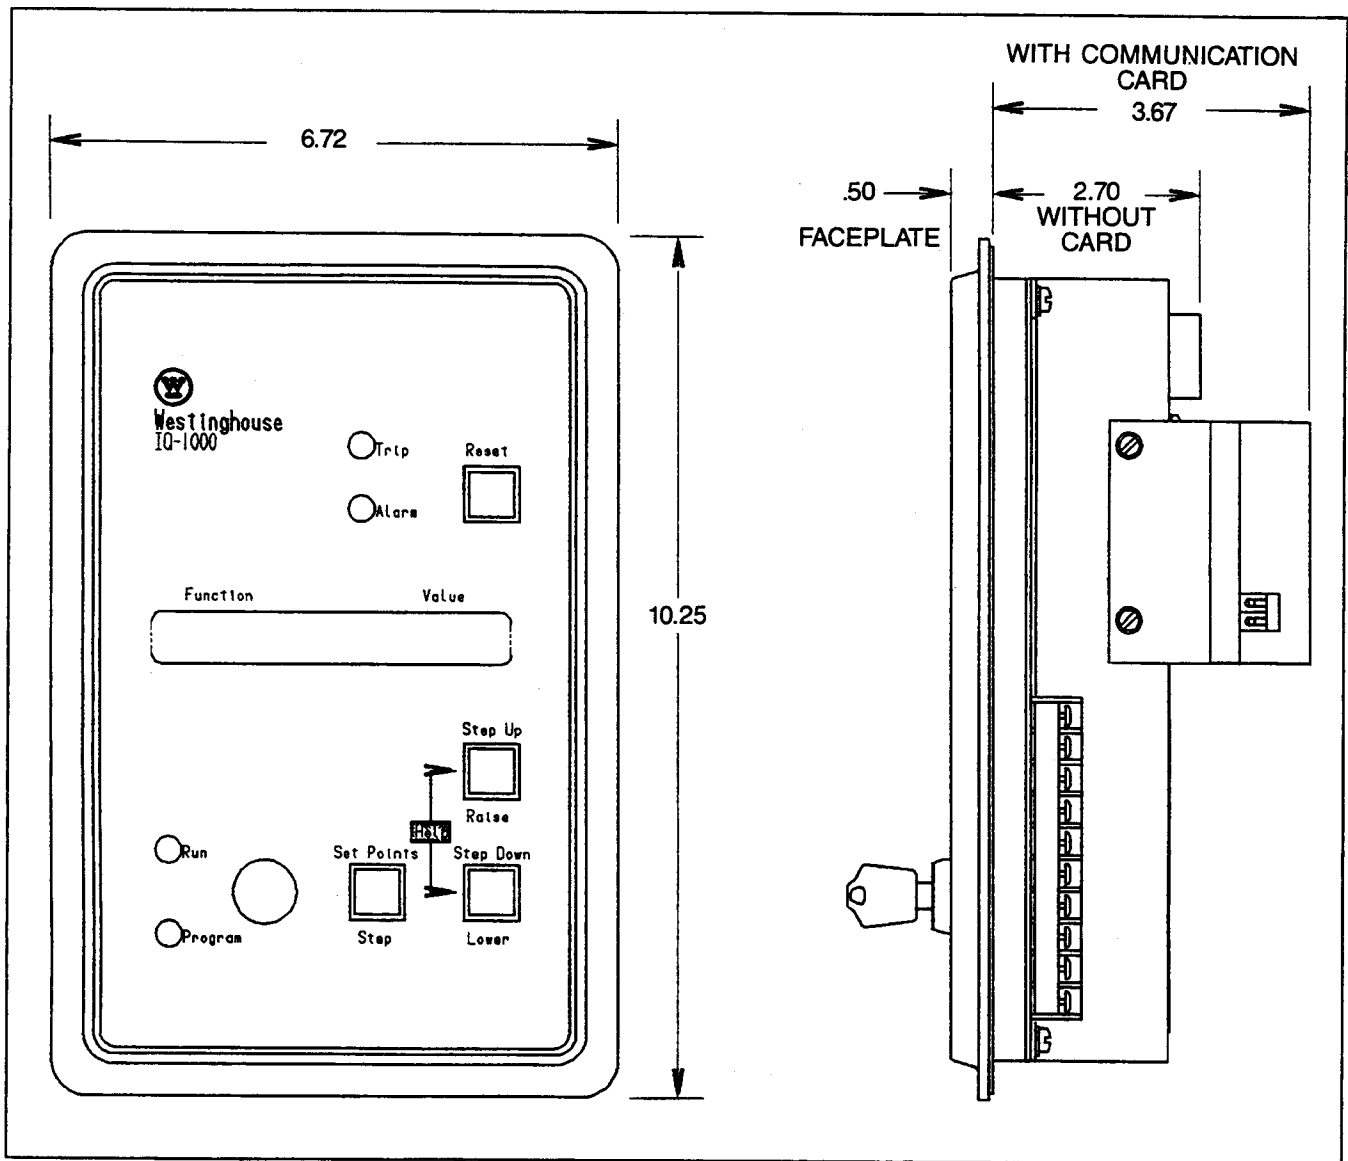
IQ-1000 Chassis Mounting Clearances
